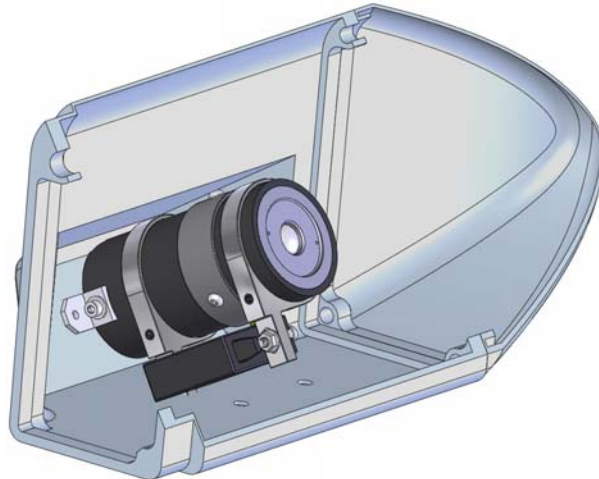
Cut away view of prototype 2.0 mounted in UAV nose using housing brackets.
